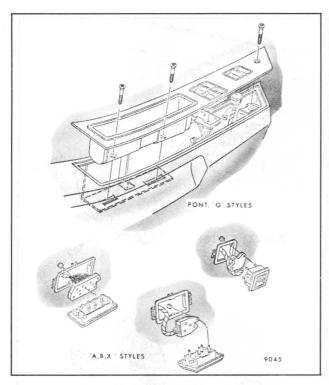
Armrest Switch Plate and Power Switch Attachment
